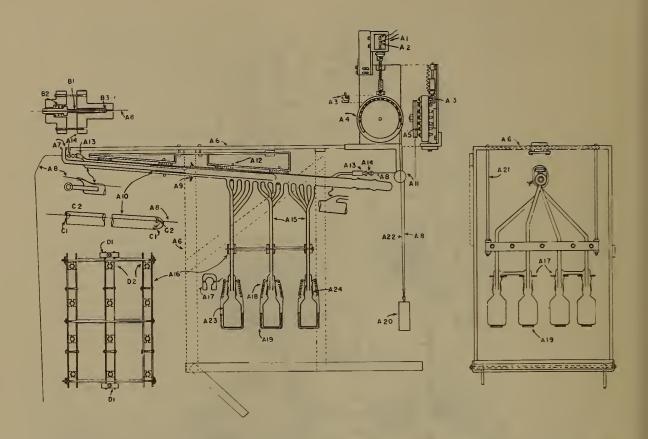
Sliding fraction collector. (A₁ to A₂) detailed points of construction of general assembly; (B₁ to B₃) details of packing glands; (A₁4), (C₁), and (C₂) details of sliding sleeve; (D₁ to D₃) details of supporting frame.
